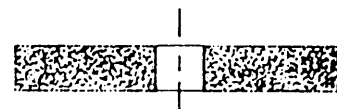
shows the type of grinding wheel used on bench and pedestal grinders. When you replace the wheel, be sure the physical dimensions of the new wheel are correct for the grinder. Check the outside diameter, the thickness, and the spindle hole. If necessary, use an adapter (bushing) to decrease the size of the spindle hole so it fits your grinder.
